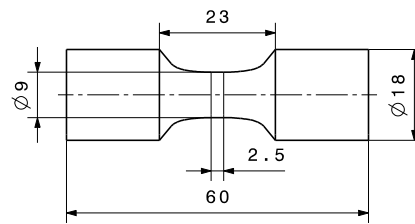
High cycle fatigue (HCF) specimen A with dimensions in [mm].
